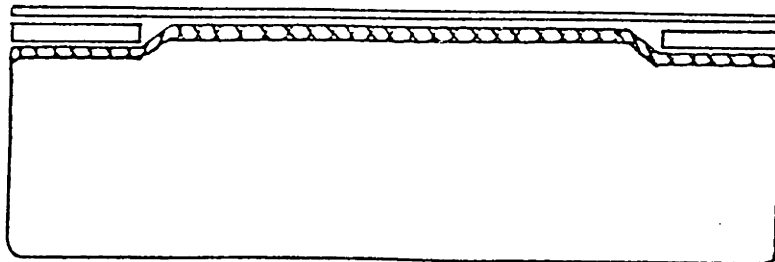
Assembly of mold showing electrodes and mold release layer.
